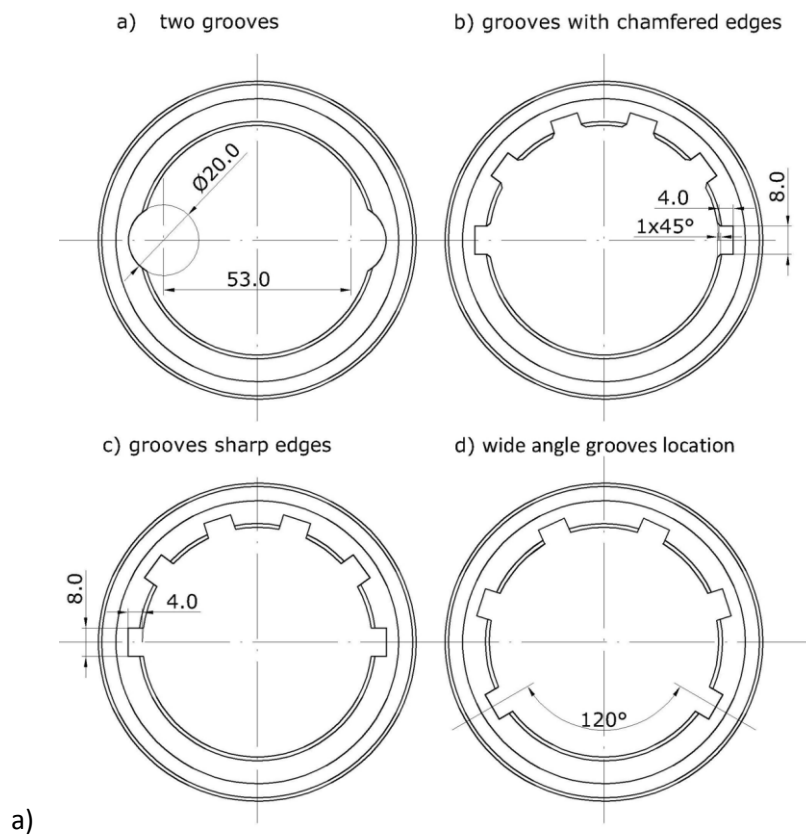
Test bearings a) two grooves, b) upper half grooves with chamfered edges, c) upper half grooves with sharp edges, d) wider spacing of the grooves.
